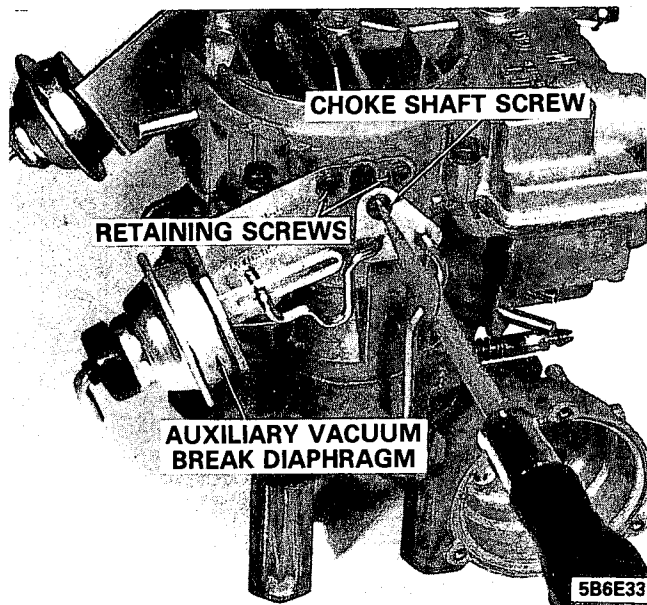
E-33 - Removing Auxiliary Vacuum Break Diaphragm
